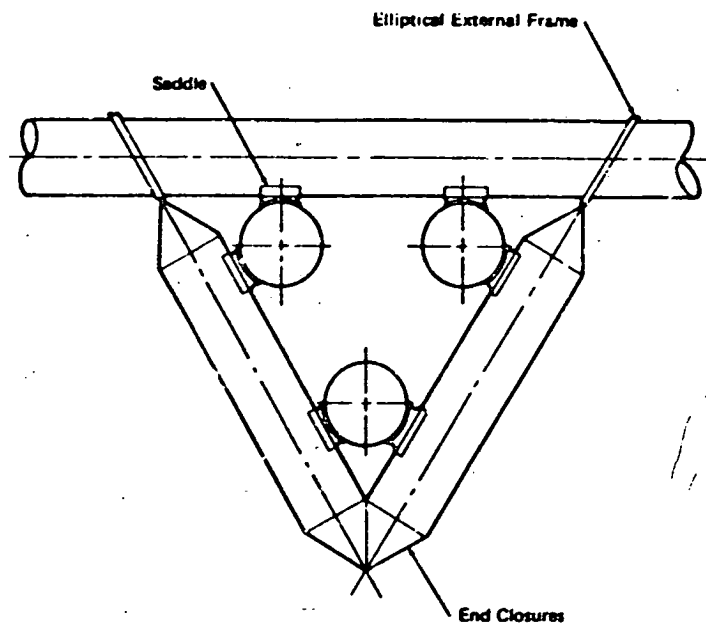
Payload Station Configuration – Internally Located Longitudinal Beams
